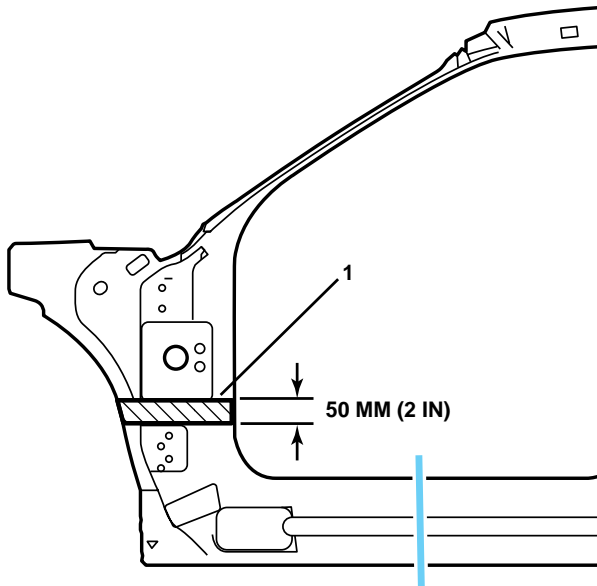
2000 DeVille Inner Front Pillar Sectioning Locations
